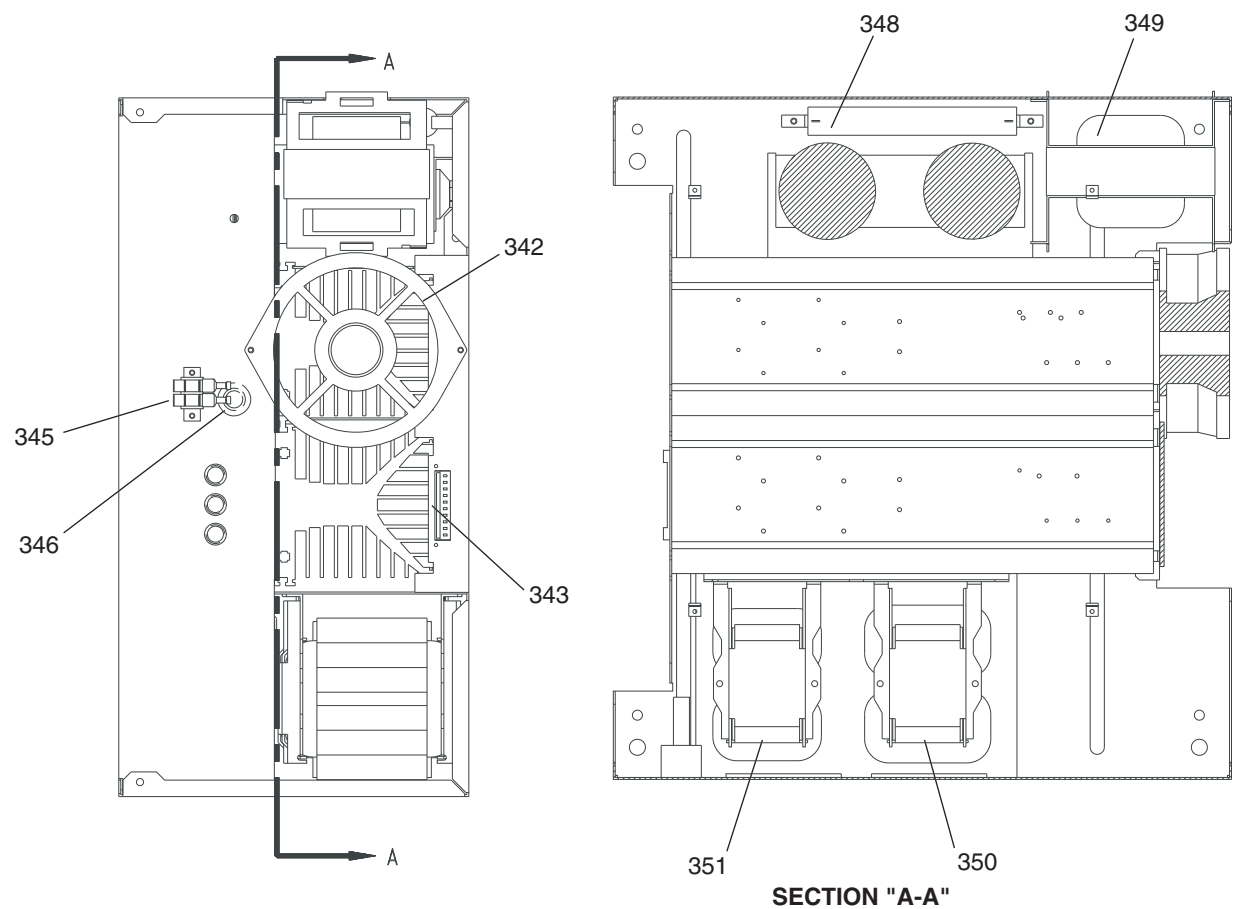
B. POWER MODULE, BOTTOM VIEW
